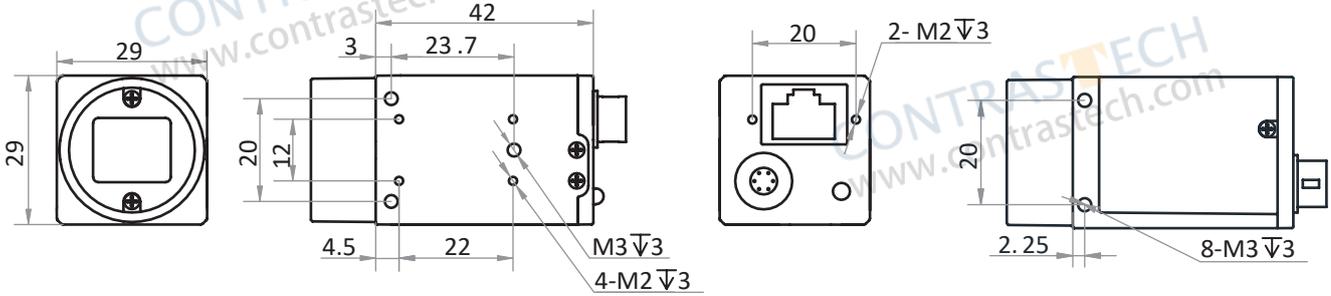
Mechanical Dimensions of the C-mount GigE Cameras with 29\*29\*42mm housing (The installation uses M2 and M3 screws).
